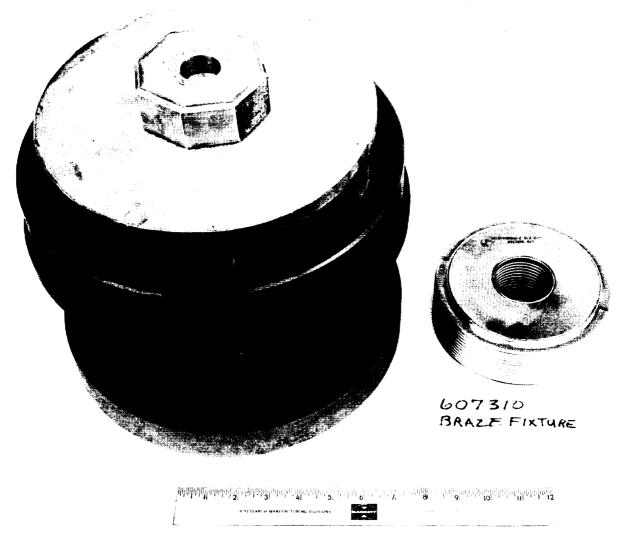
Assembled View of Graphite Brazing Fixture (Tool No. T-607310)
